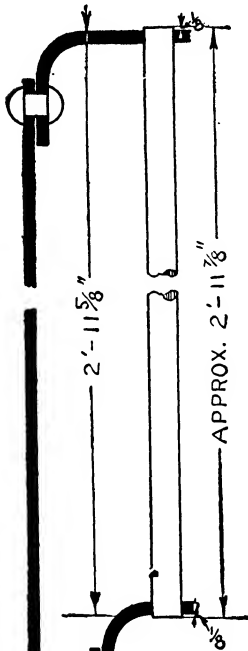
,741.—Detail of tube and sheets showing allowance for cutting and tube margin outside of sheets for beading.
